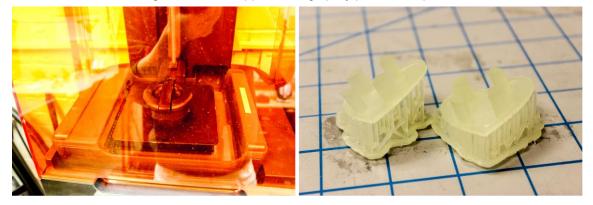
The small heart shape gadget connecting two slide bars printed with resins
